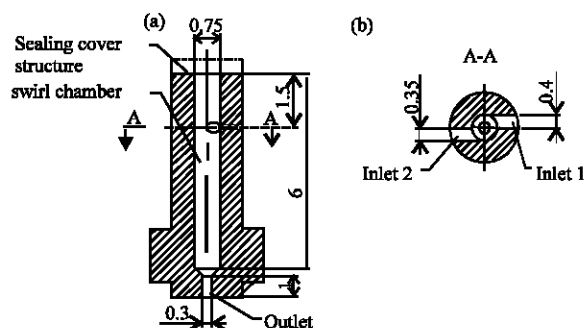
(a-b): Structure sketch of the tangential-inlet swirl nozzle, (a) A sectional view of the nozzle and (b) A-A cut of the nozzle
